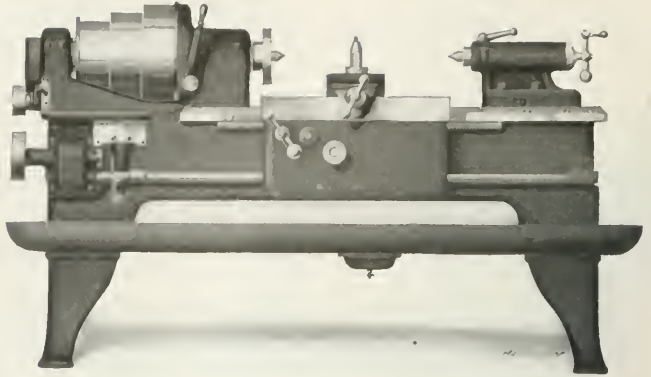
Rockford 16-inch High-power Manufacturing Lathe
